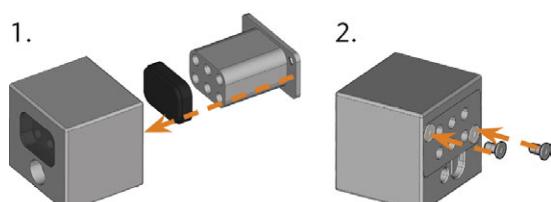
INSERTING AN INSERT INTO A TOOL MAGAZINE
